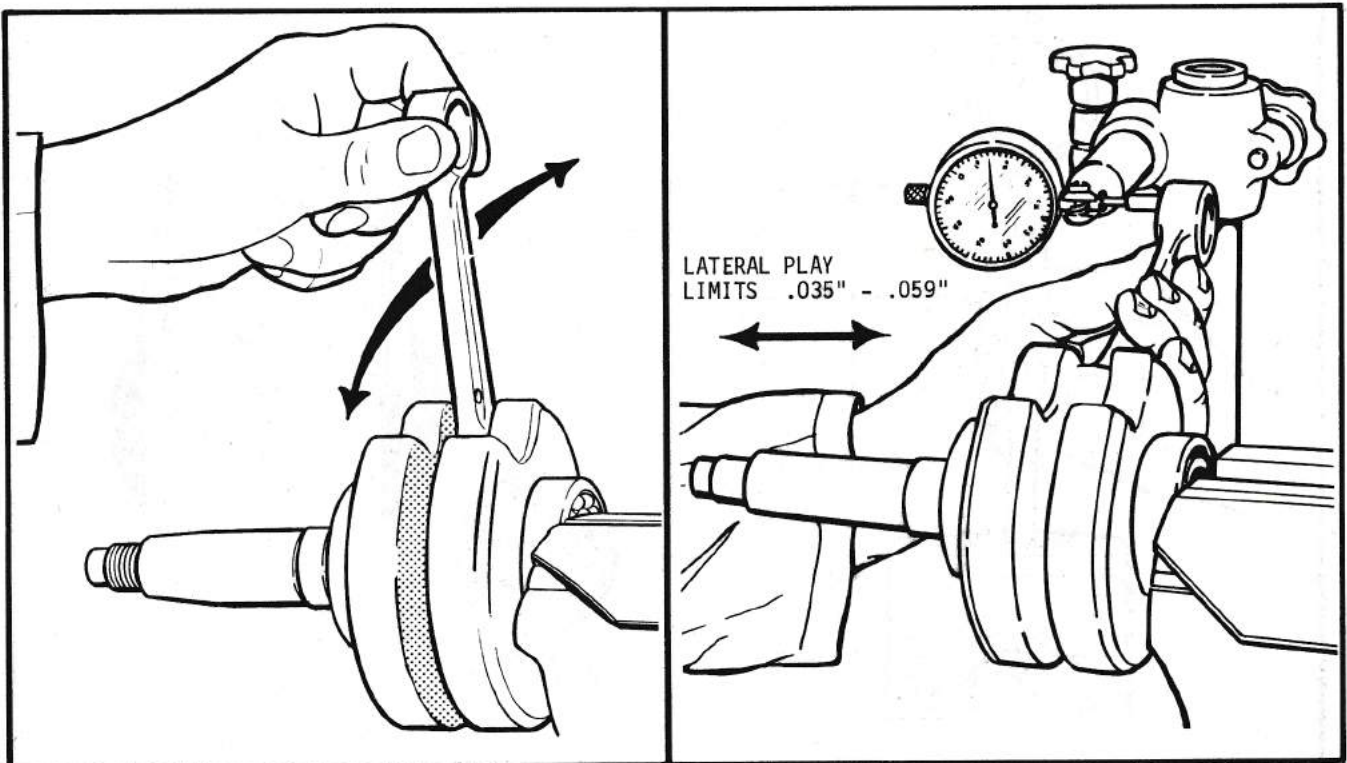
CHECKING CONNECTING ROD BEARINGS
